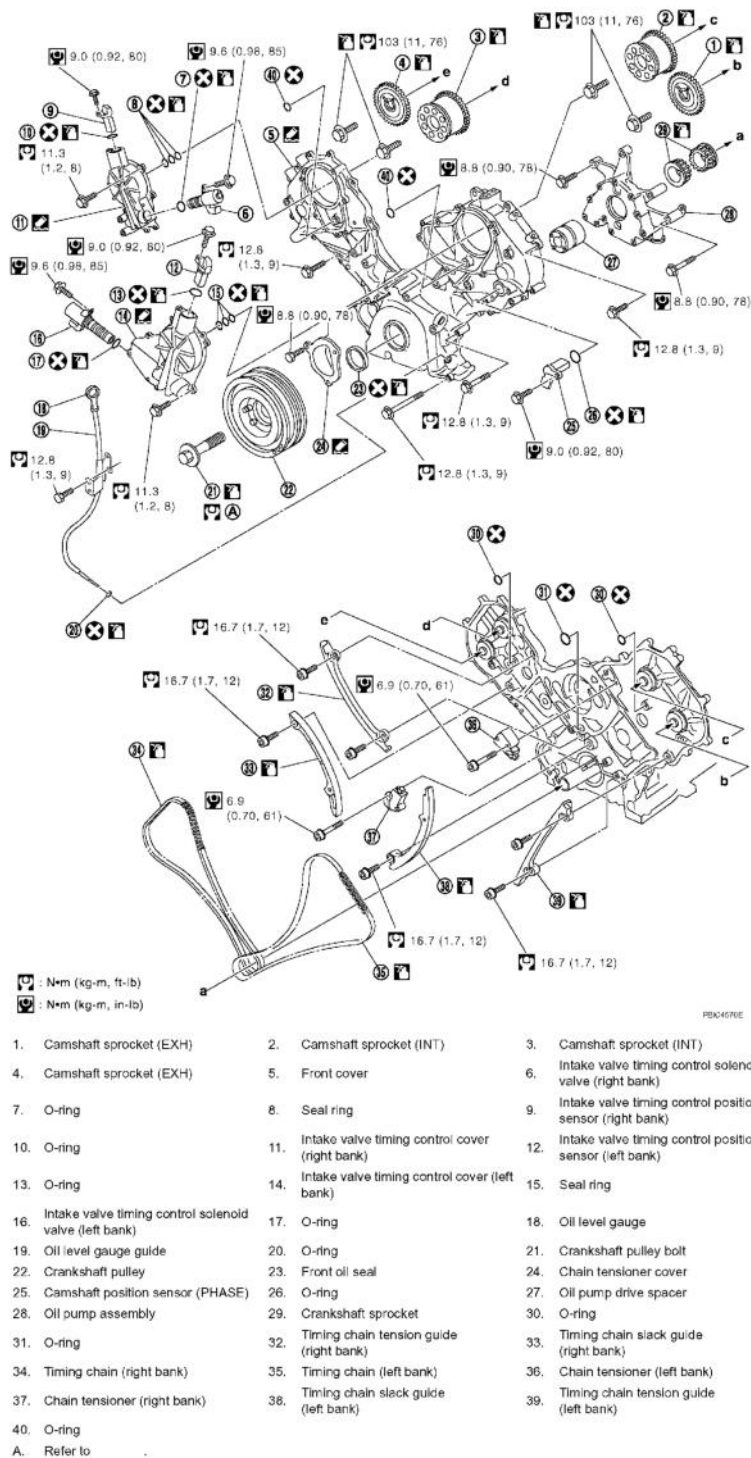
Exploded View Of Timing Chain Components With Torque Specifications
